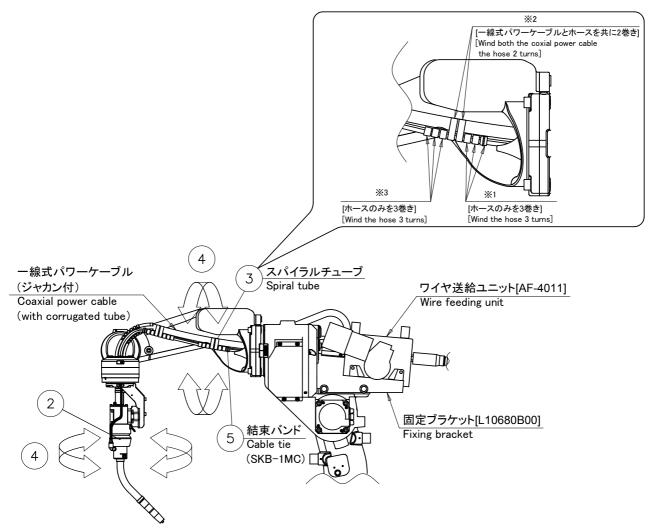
Connection of cooling water hose (For B6 type manipulator)
